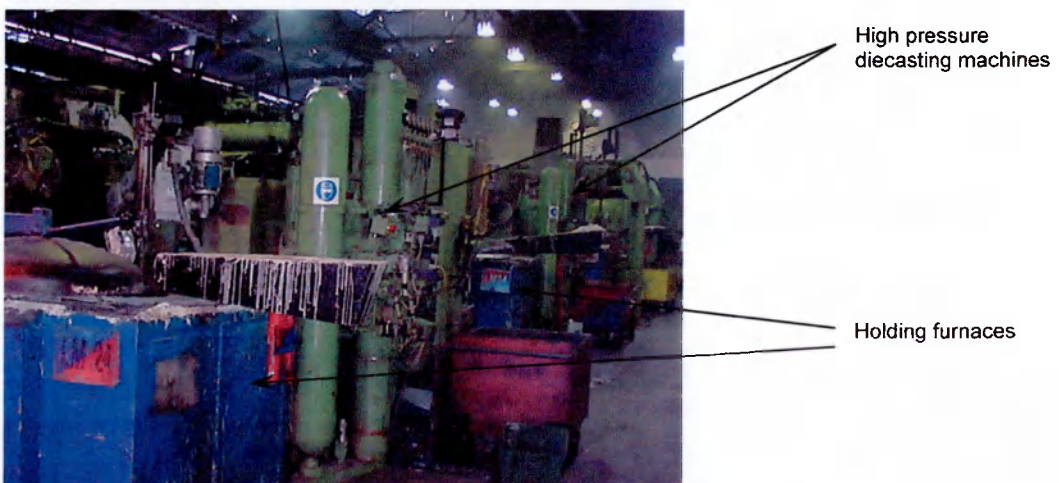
Arrangement of 400 t pressure diecasting machines & holding furnaces at Foundry C.
